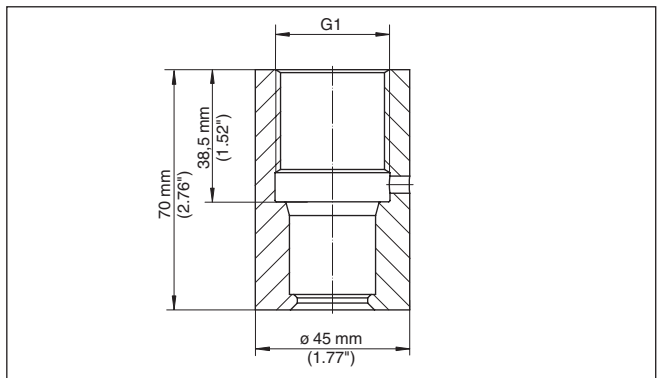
Dimensions welded socket G1 suitable for PASVE (for the two previously listed versions) - VEGABAR 82
